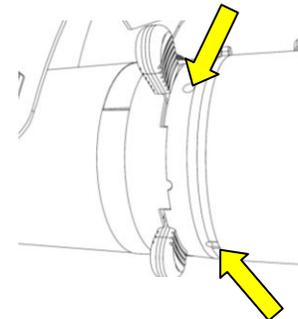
Remove the locking set screw and rotate the lens train to remove. Align take-down notches to attach/remove the lens.
